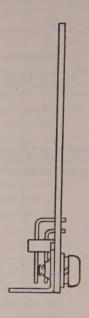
OPTION 45 MODELS 6241A, 6242A & 6243A A5, TONE MULTIPLIER PC ASSEMBLY #05757401 Rev A
